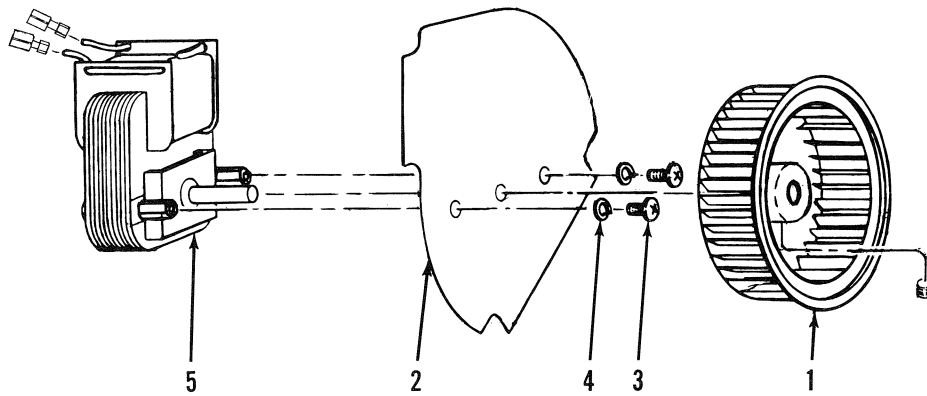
MOTOR MOUNTING PLATE ASSEMBLY
